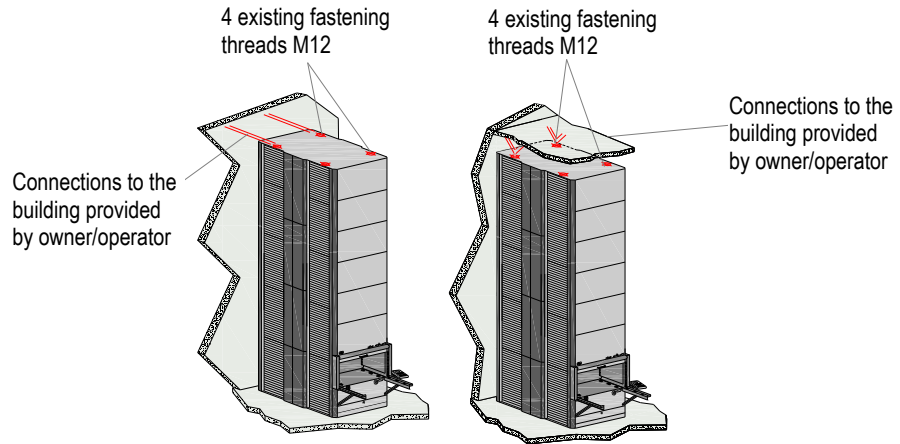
Reinforcement examples: Anchoring provided by owner/operator at the building ceiling/wall
